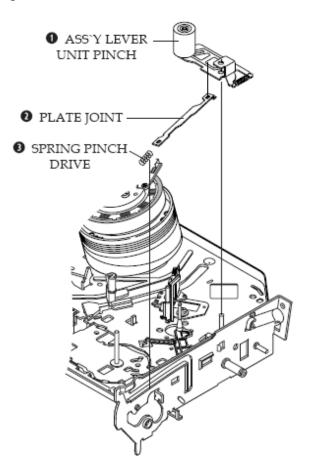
Ass'y Lever Unit Pinch , Plate Joint, Spring Pinch Drive Removal
